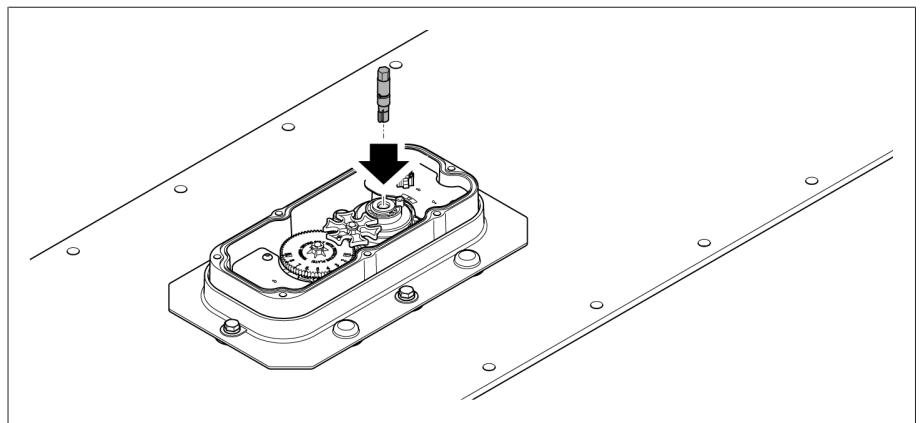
Inserting the emergency drive shaft into the shaft of the on-load tap-changer
